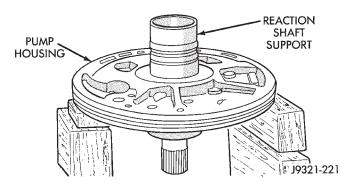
Assembling Reaction Shaft Support And Pump Housing
